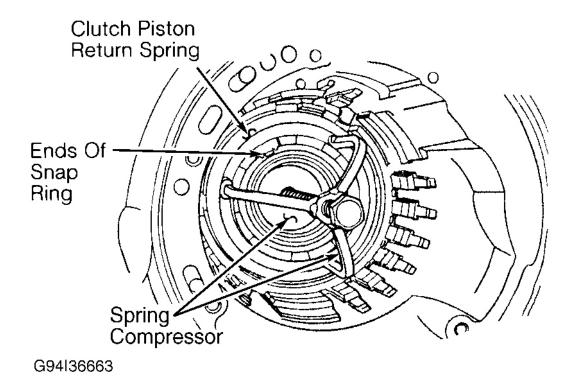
Compressing Clutch Piston Return Spring Courtesy of CHRYSLER LLC
